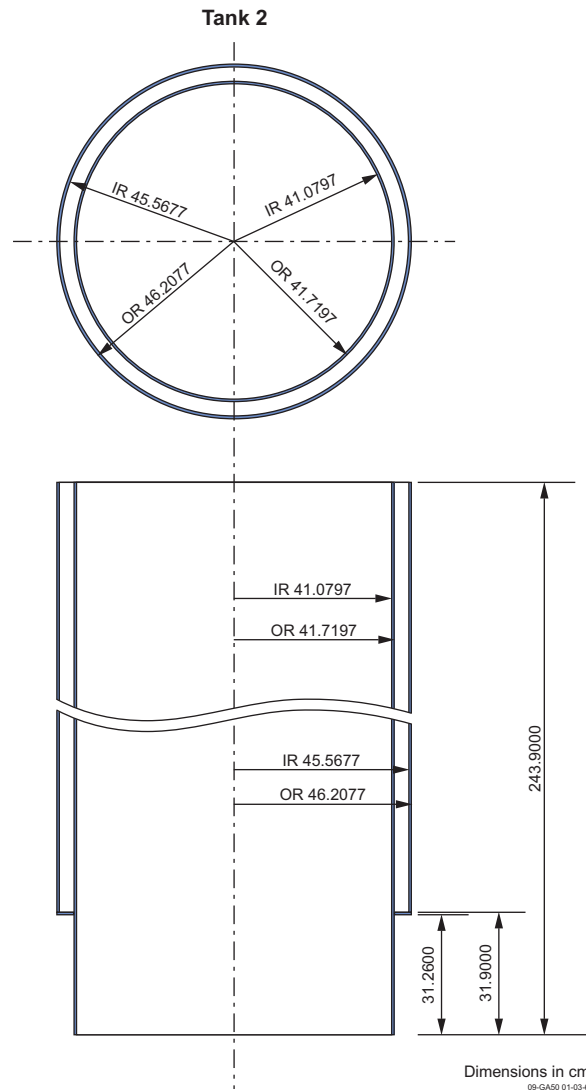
Tank 2 Dimensions Simple Model, Bottom 31.26 cm is the Extended Skirt.
